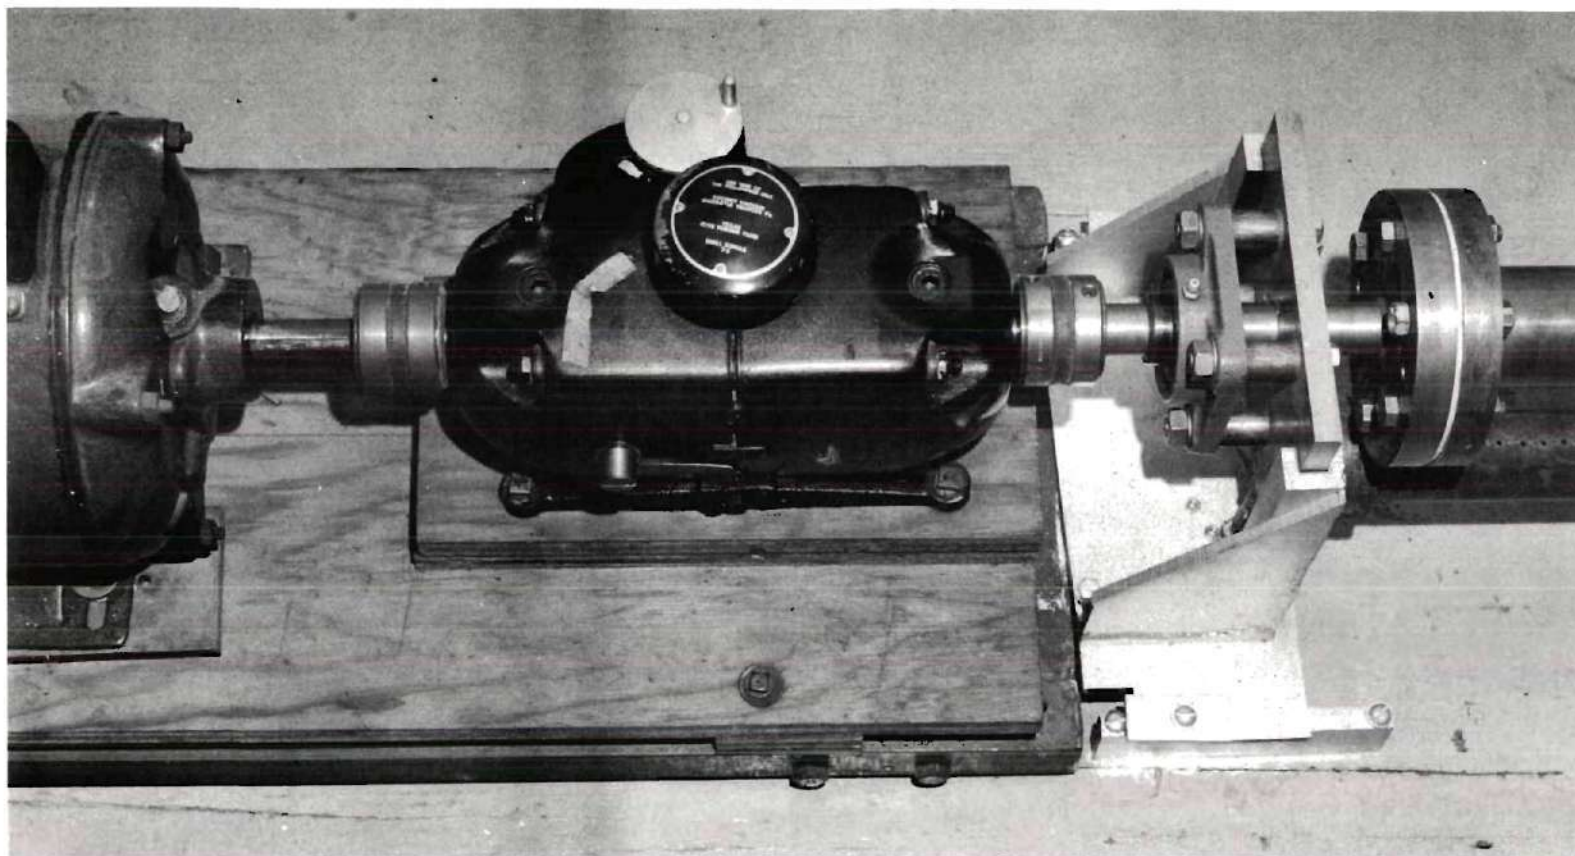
Transmission and Bearing Support Set Up for Coating Procedure.
